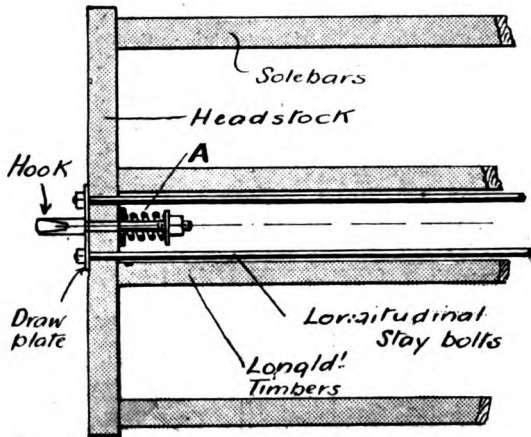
SKETCH SHOWING THE LONGITUDINAL BOLTING OF HEADSTOCKS.
